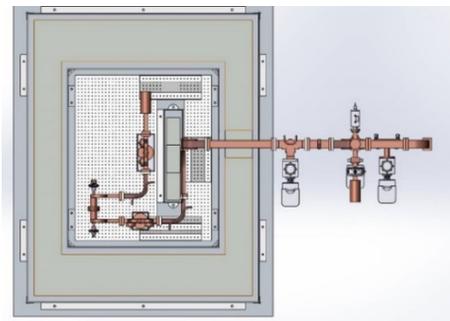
The top view of the waveguide assembly for the CERF-NM Test Stand. The assembly of two Mode Launchers (Mode Converters) at the end of the waveguide is shown on this figure. Courtesy of Harbhajan Khalsa.
